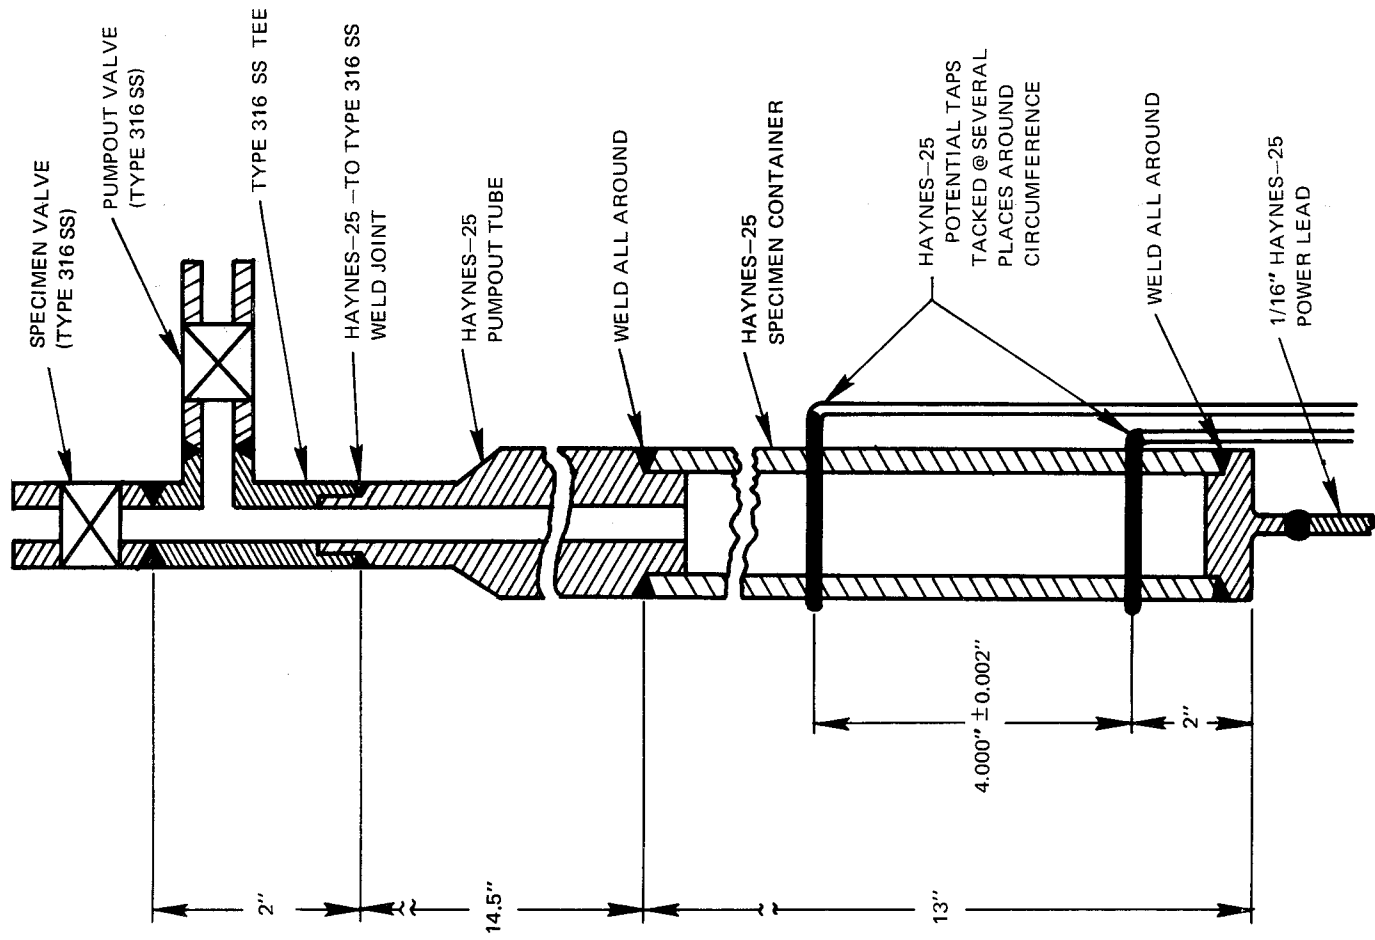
Specimen Assembly for Specimen Container Calibration and Lithium Resistivity Measurements
